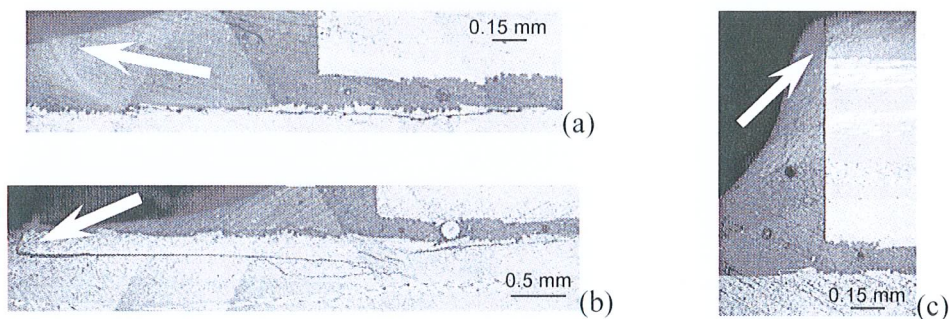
Edge views of crack onset in the case of fillet corner geometry
